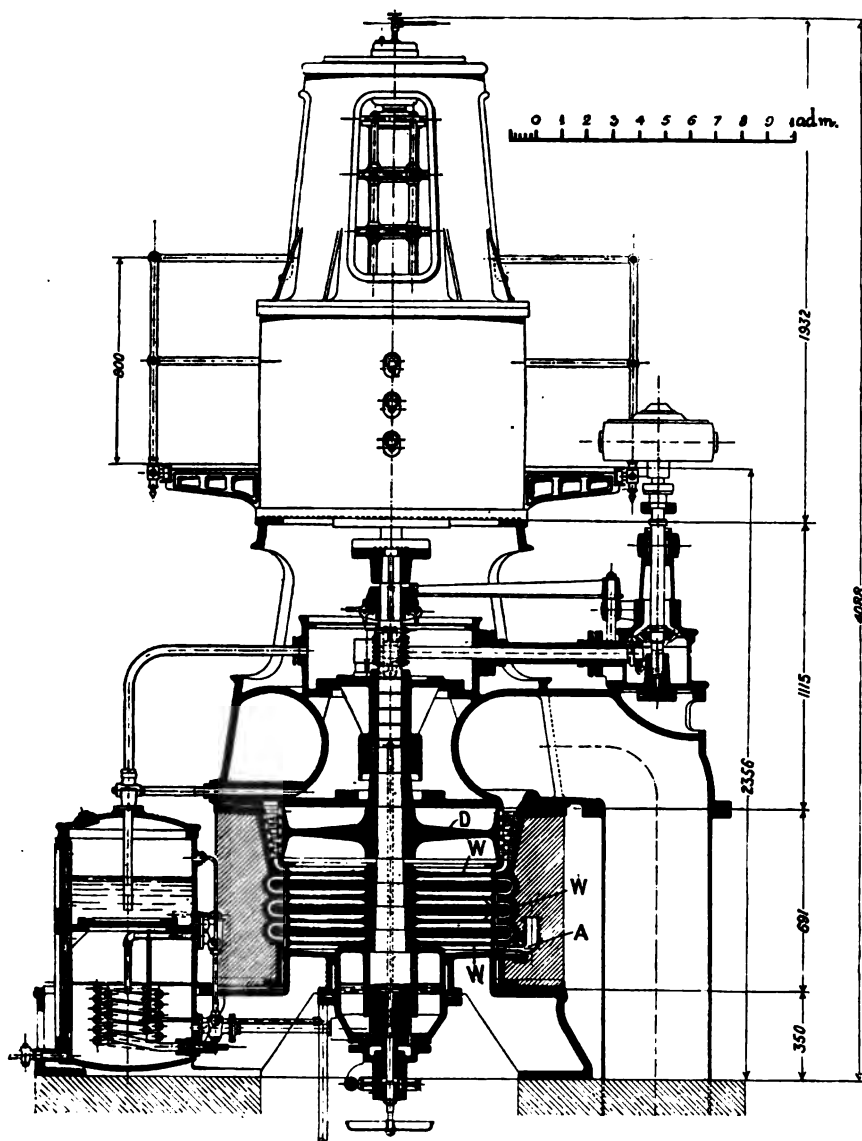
Vertical Section of Union Steam Turbine with Electric Generator.
